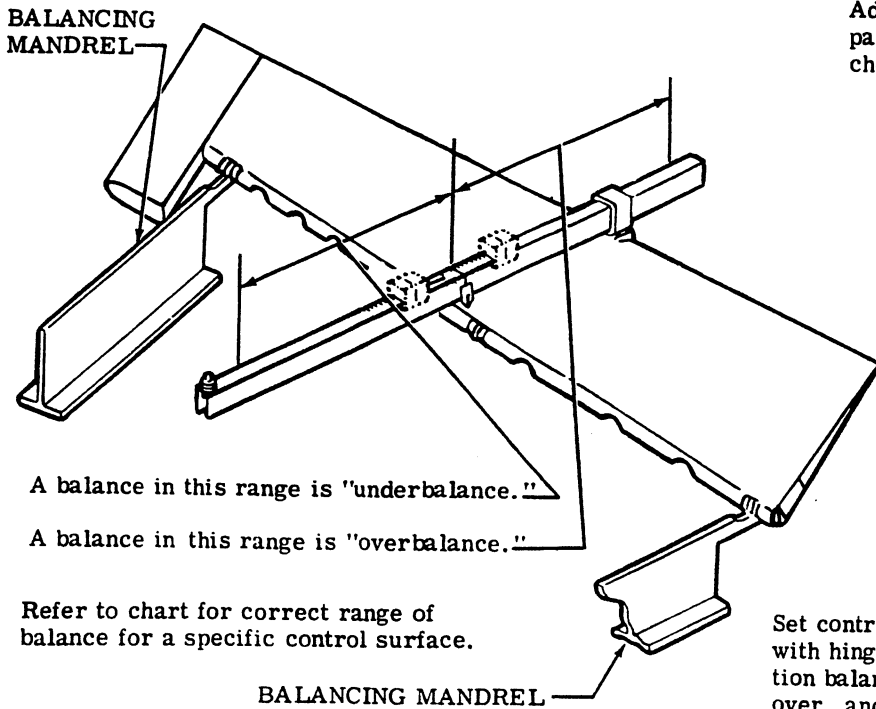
Control Surface Balancing (Sheet 2 of 3)
